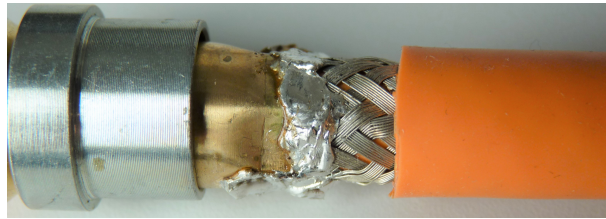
A crimped and soldered ferrule on a cable sample
